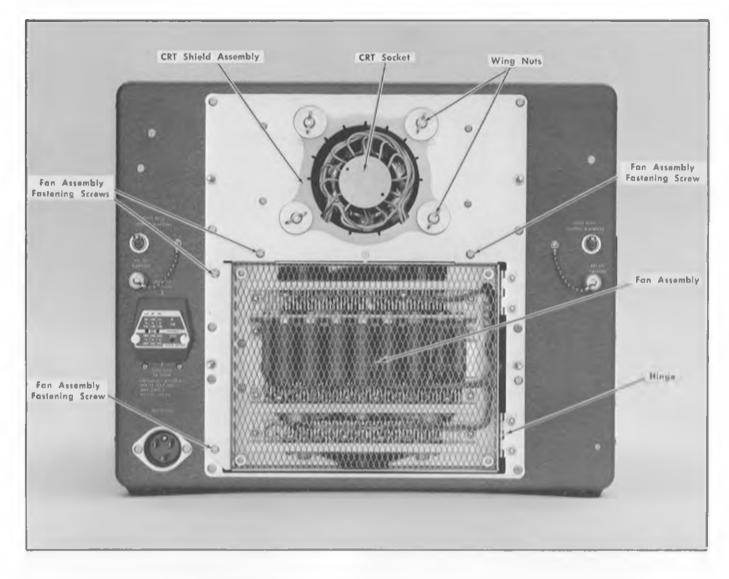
Instrument rear view, CRT replacement (filter housing removed).
